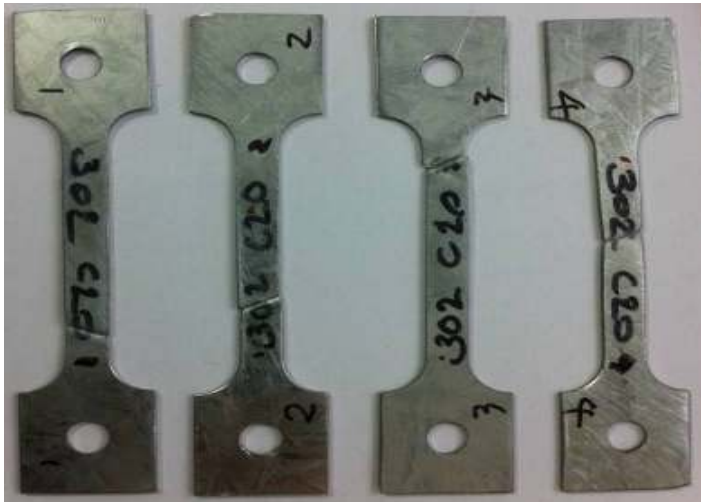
Photograph of sample tensile coupon test specimen after failure
